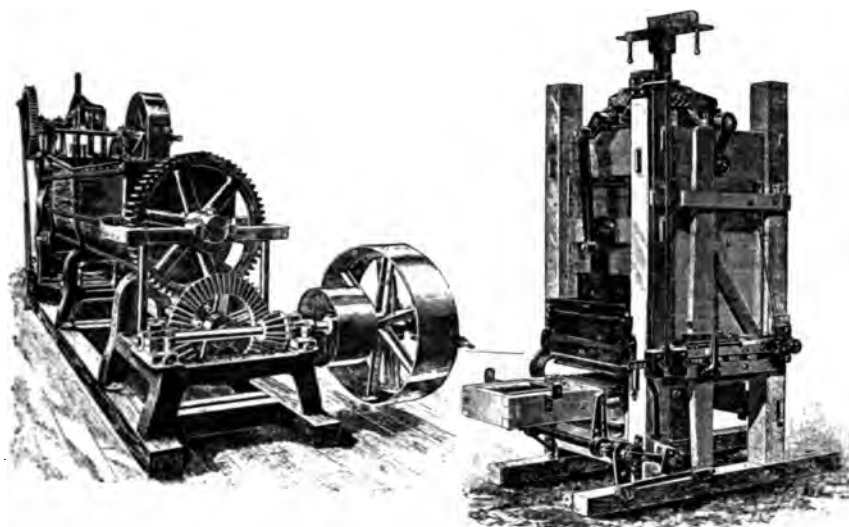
Horizontal Machine for Soft Paste worked by Steam. Fig. 88.—Vertical Machine for Soft Paste worked by Horse-gear.
